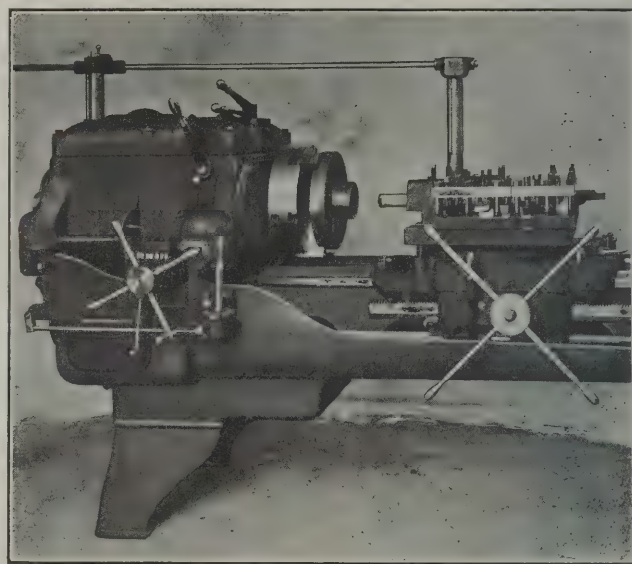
Double-spindle Machine equipped with 17-inch Chuck for Single-spindle Operation
